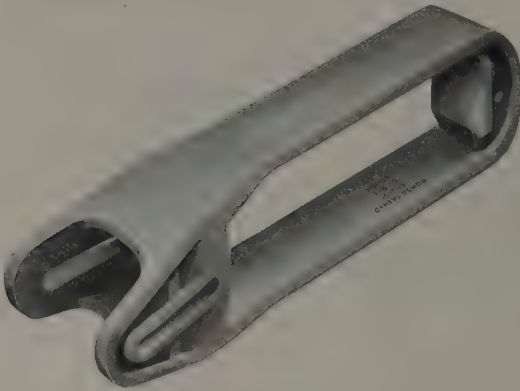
Universal Keyed Yoke for U. S. Government Standard Cars. Universal Draft Gear Attachment Company.
